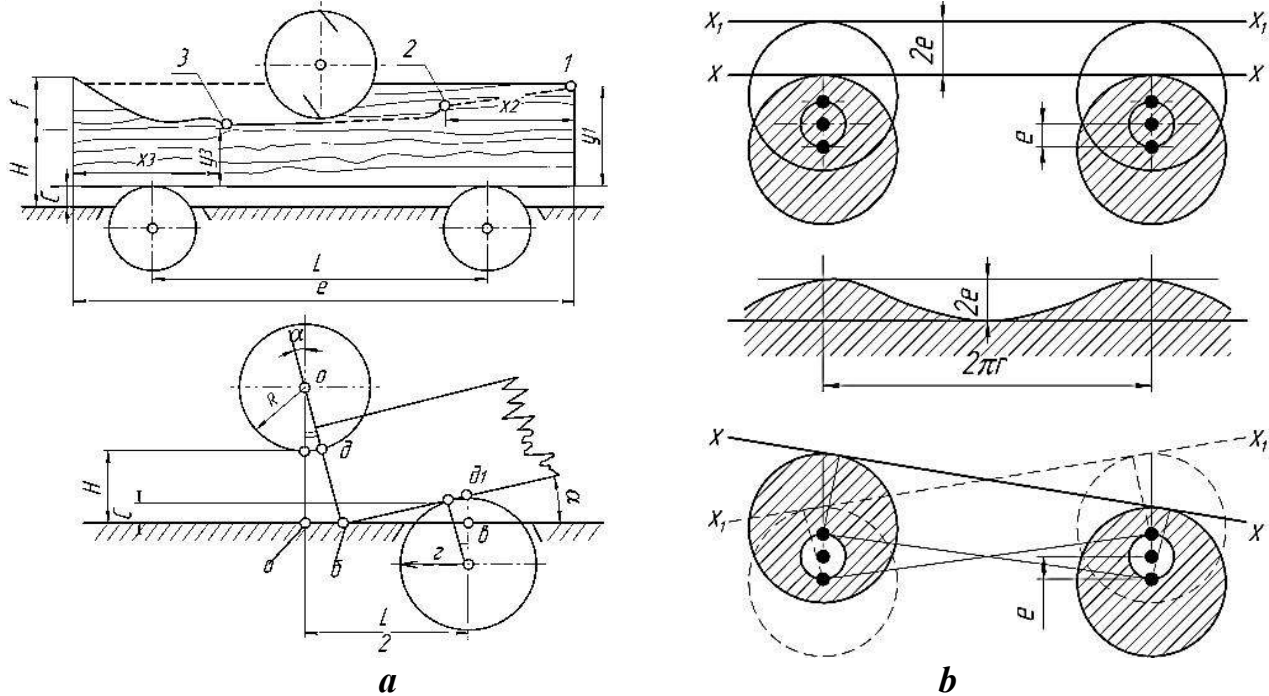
Diagrams of errors of movable locating on a plate with rollers :
